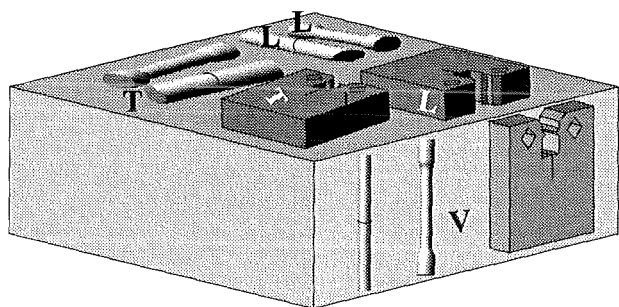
90 mm thick Type 316LN metal sample and the machined specimens from the plate
